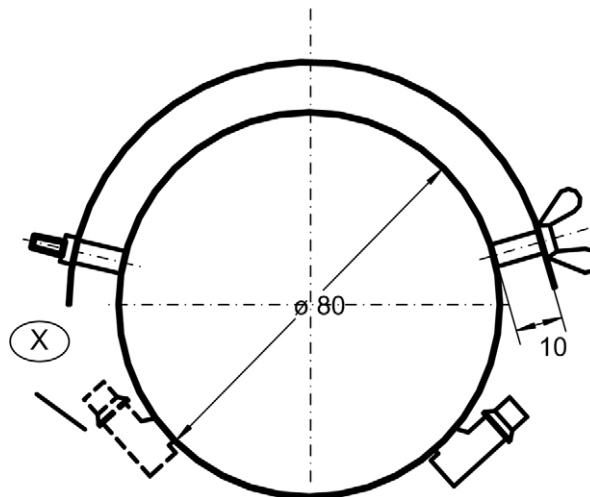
Mounting of weather shield type 659R6030 (rear view)
